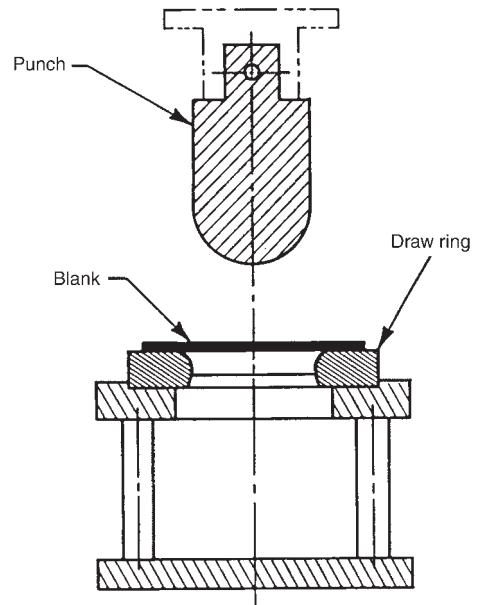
Cross-sectional view of a simple, single-action punch and draw ring used for deep drawing beryllium. Source: Blakeslee 1979
